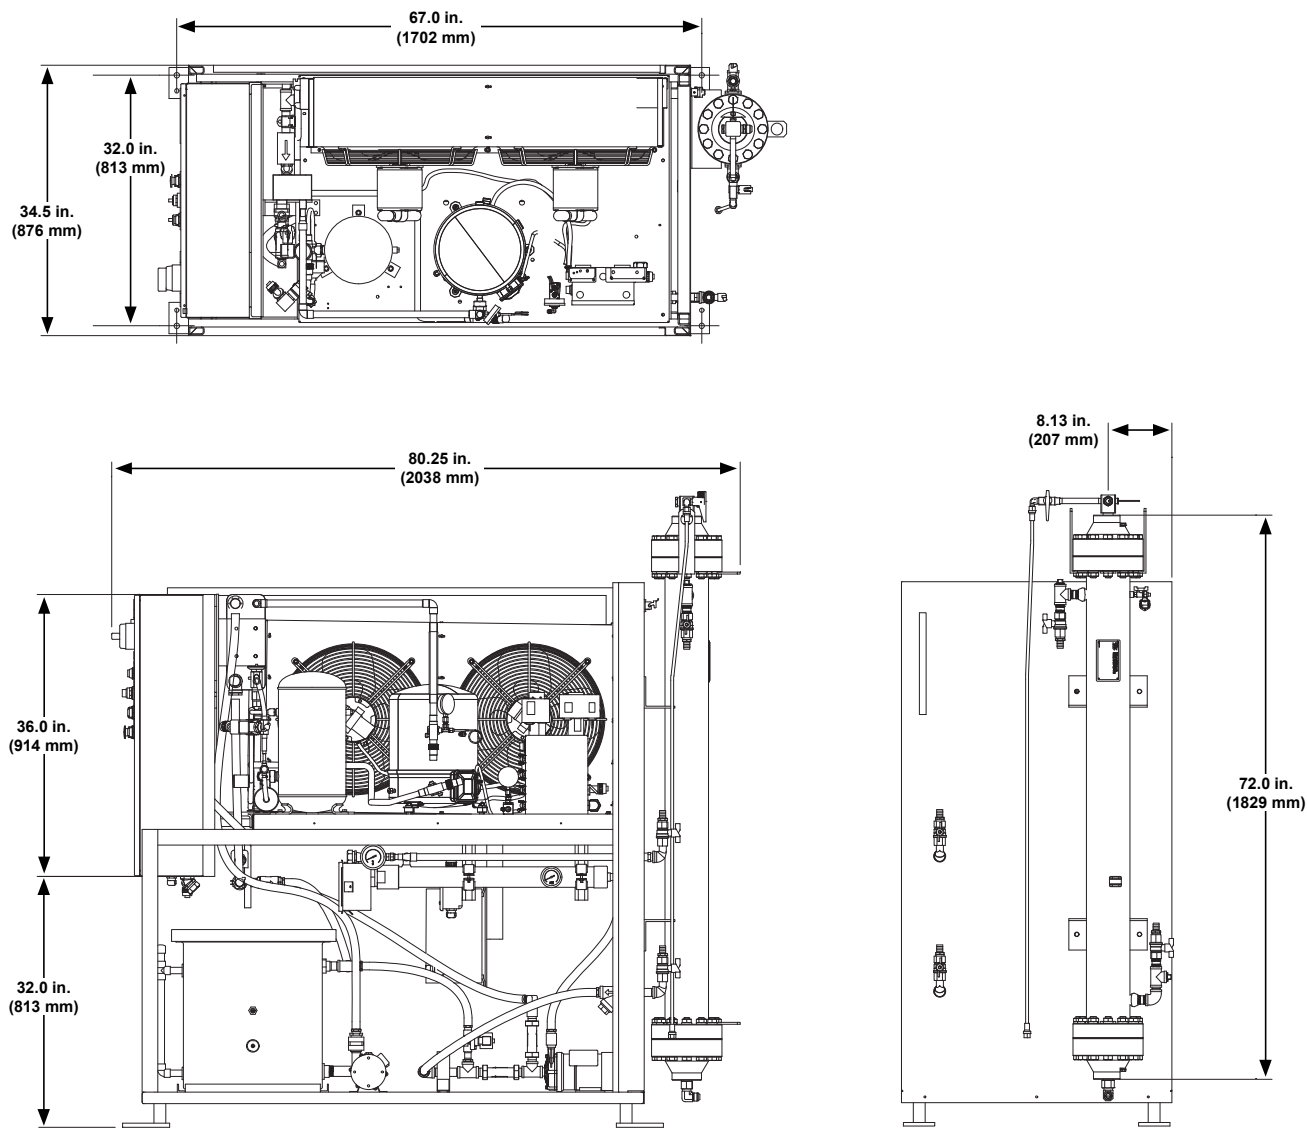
Single-Air Cooling System With Heat Exchanger Dimensions
